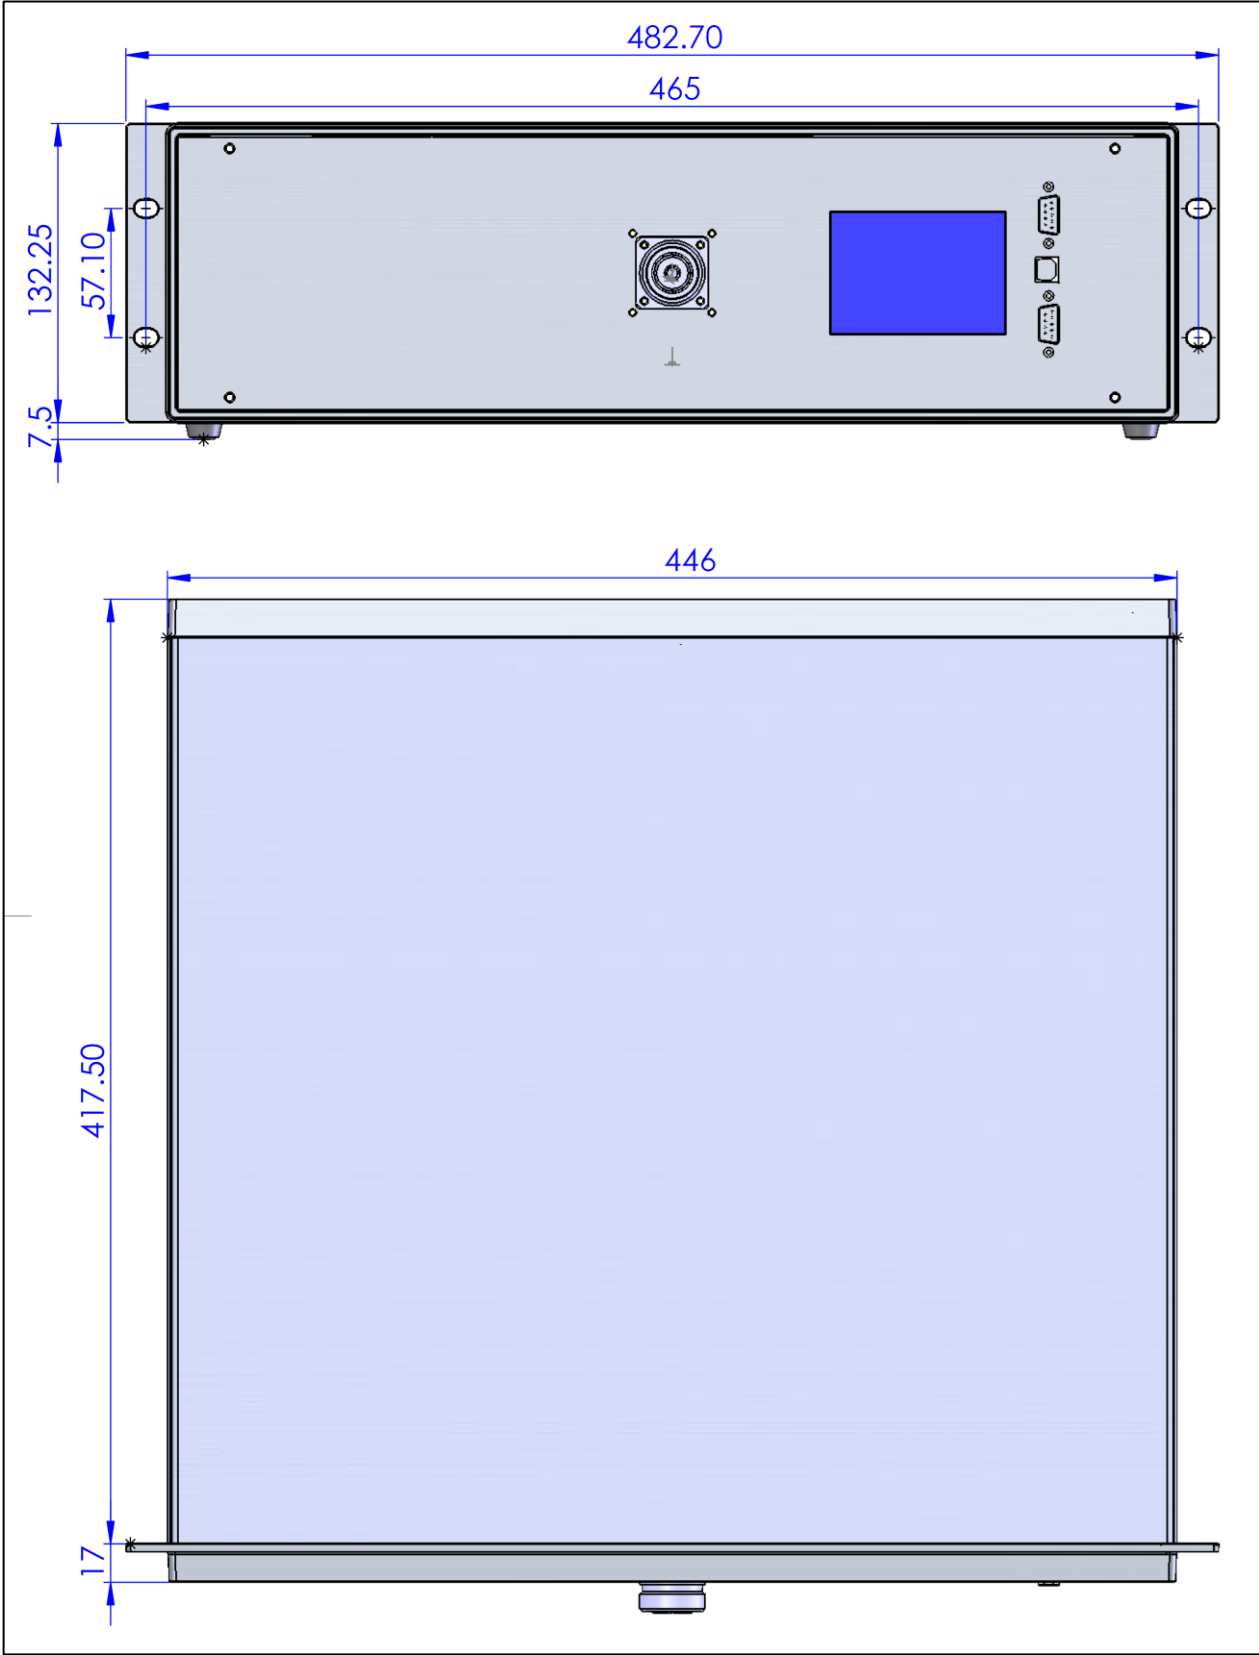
Basic dimensions of solid state generator STPG 2450. All dimensions are in millimeters.
